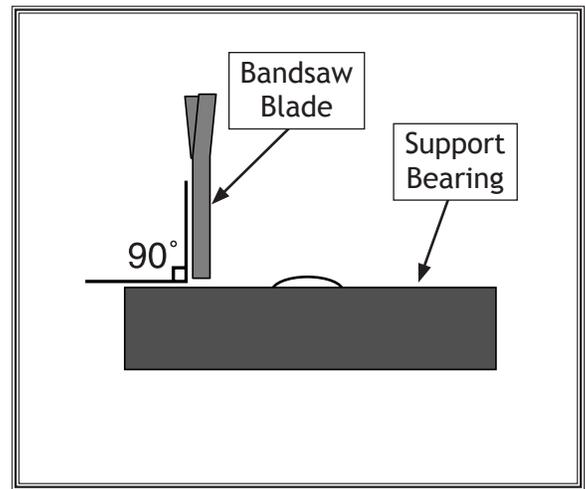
Illustration of blade set perpendicular (90°) to the support bearing face.
